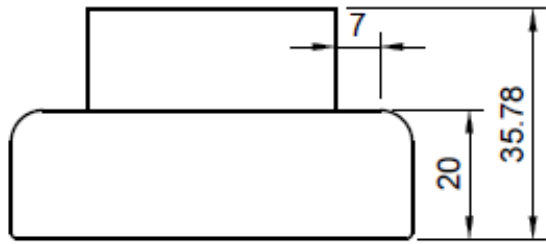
First unfolding device. Unit of dimensions in mm
